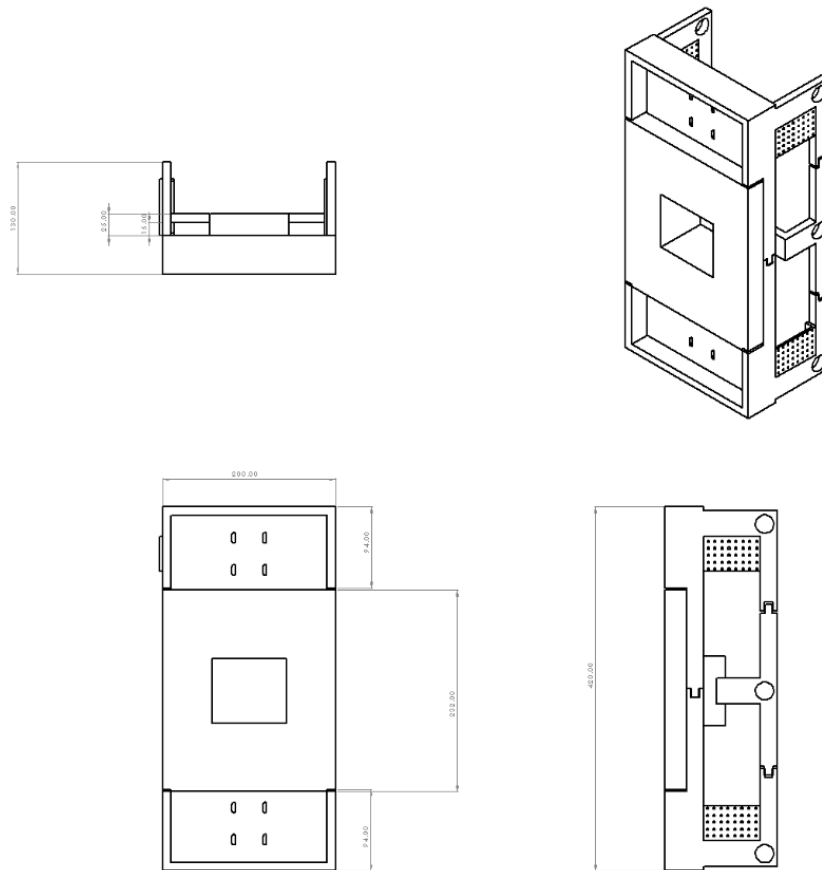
Dimensioned engineering drawing of the frame assembly, showing the orthographic and isometric views, principal frame dimensions, shaft locations, and component-mounting features.
